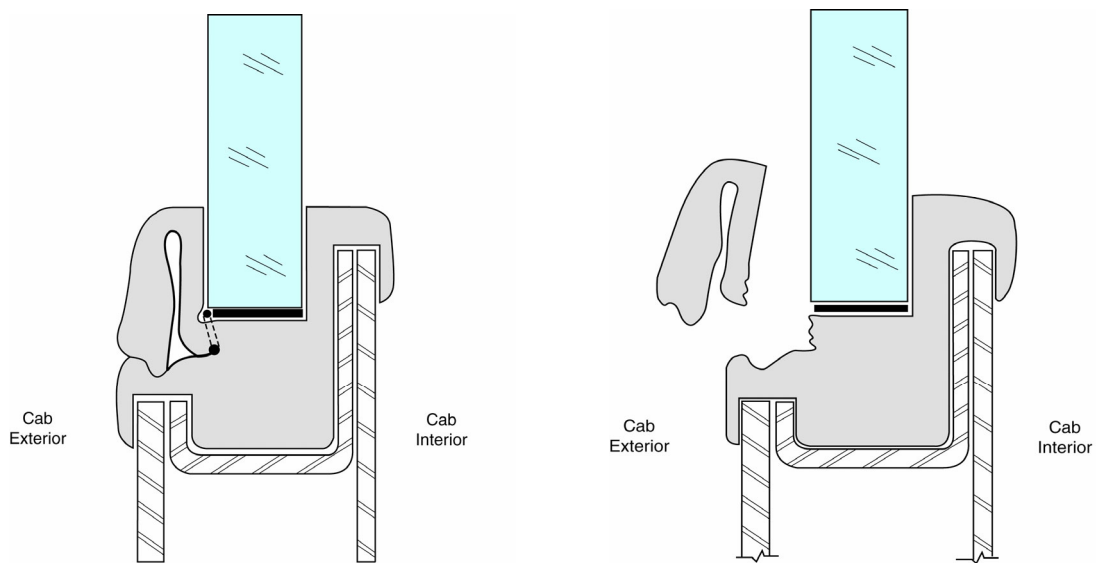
Sectional view of gasket before and after cutting by the double loop wire
